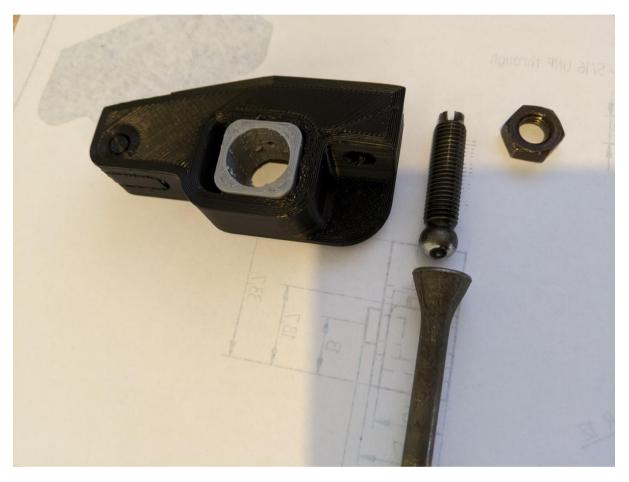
Pushrod and pushrod adjuster bolt being the shape limiting factor
